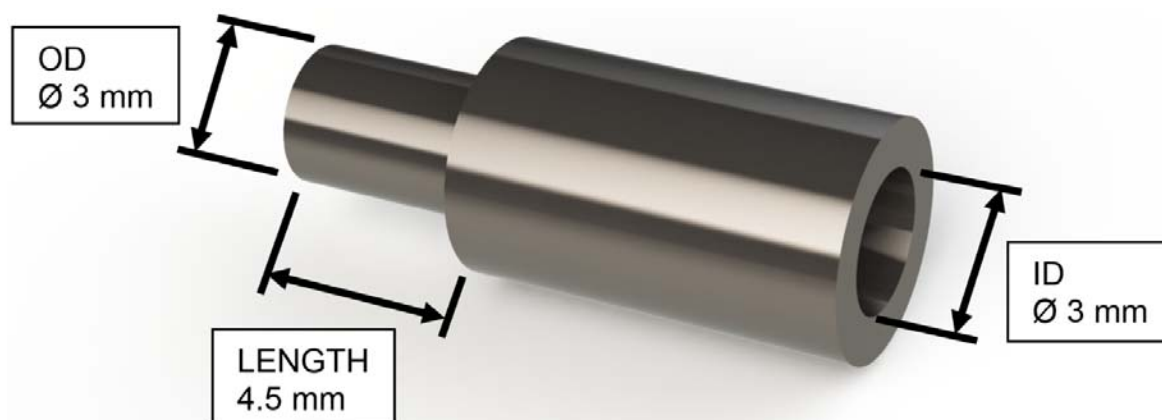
CAD rendering of the dimensional artefact. Showing the dimensions for the OD, ID and Length.
